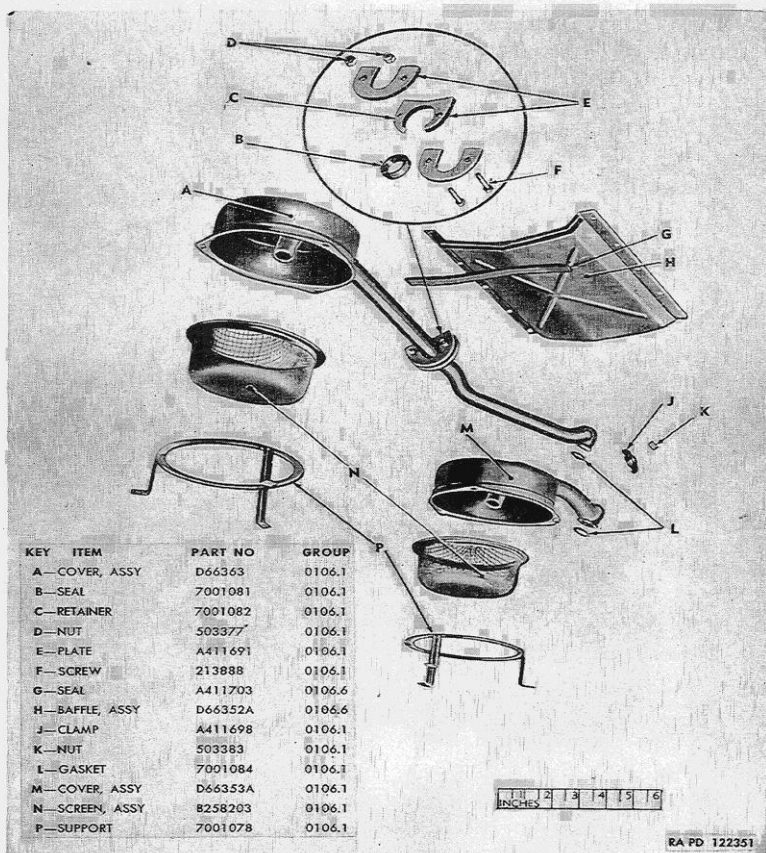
Engine oil baffle and screens, current type, exploded view.
